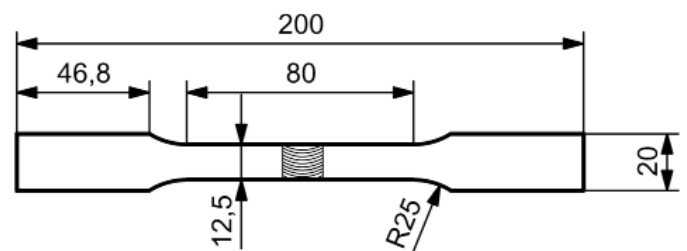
Uniaxial tensile testing geometry (dimension are in mm)
